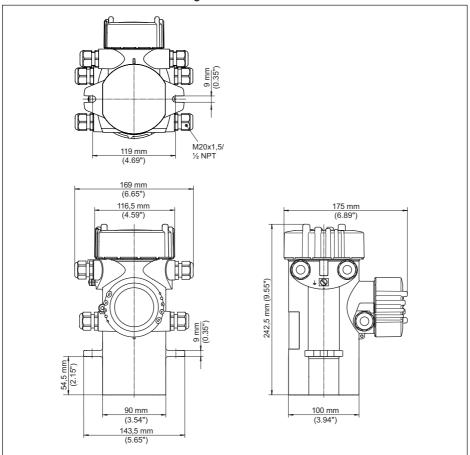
Aluminium housing or stainless steel housing (precision casting)
